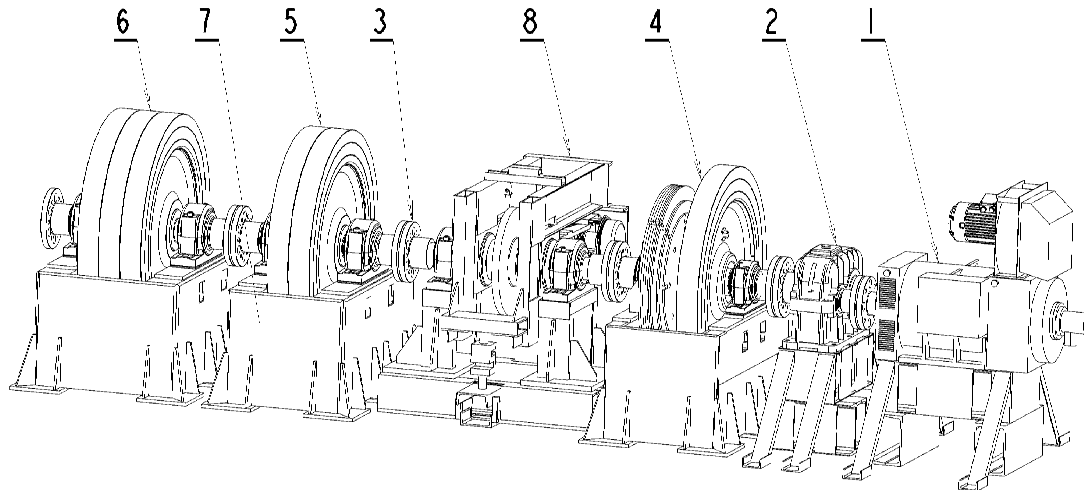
UIC flywheel test bench 1 - D. C. electric motor, 2 - gearbox, 3 - electromagnetic disengaging clutch, 4 - flywheel with adjustable moment of inertia, 5 and 6 - flywheels, 7 – base frame, 8- disc brake test group
